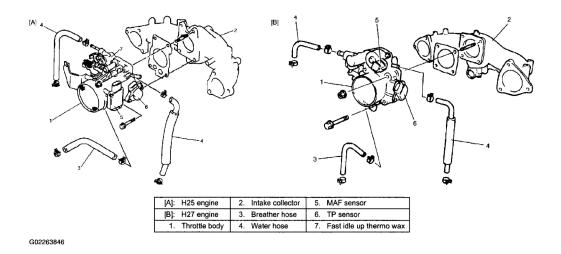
Exploded View Of Throttle Body Components Courtesy of SUZUKI OF AMERICA CORP.
